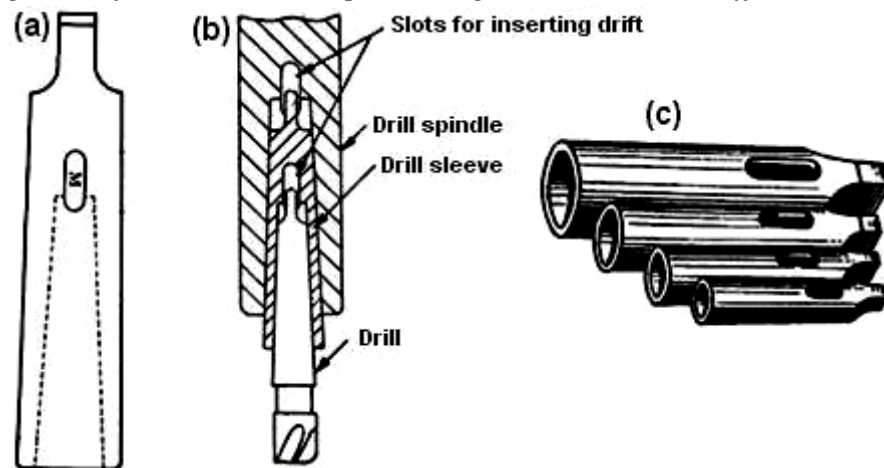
(a) Drill sleeve (b) Drill sleeve holding a drill fitted in the drill spindle and (c) Different sizes of drill sleeves.
